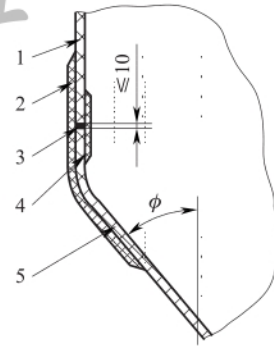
Butt joint between the conical head and the cylinder
